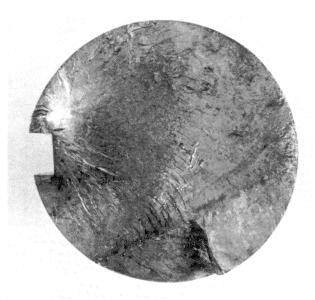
Bending Fatigue Failure of a Zirconium Alloy 705 Pump Shaft Initiating in the Keyway.
